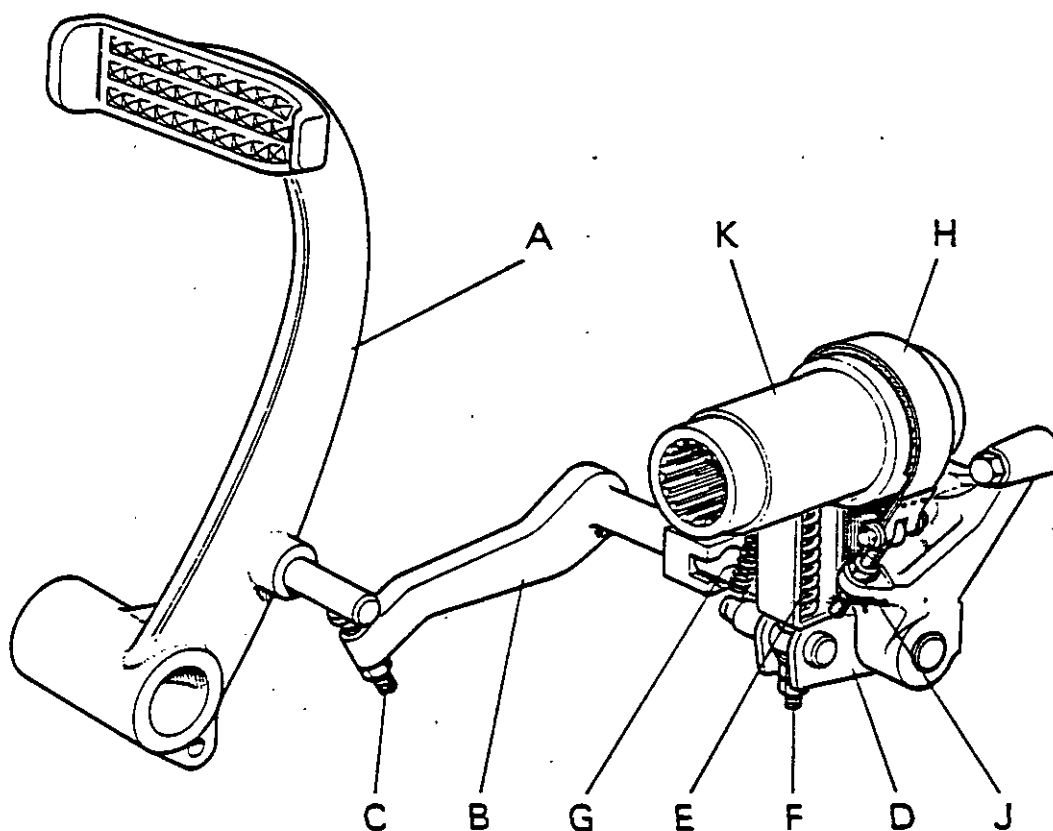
CLUTCH STOP — 1200 LIVEDRIVE TRACTORS
